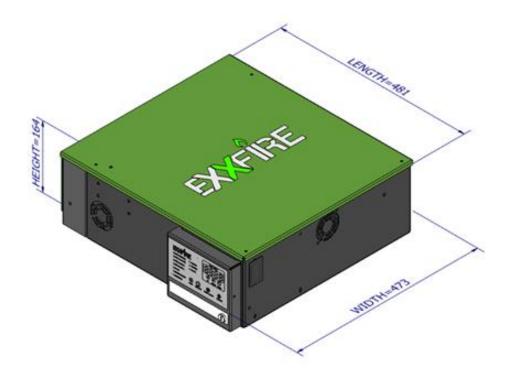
Product dimensions (EXX-1500CNF flex-User Interface mounted at left side panel)
